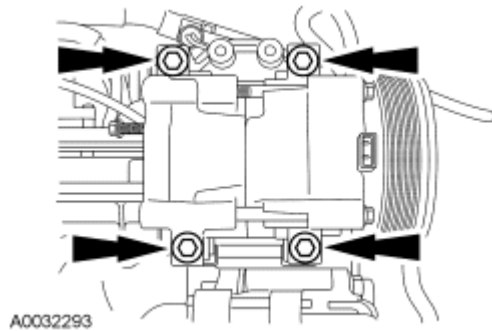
Locating Bolts & RH Engine Mount Bracket
